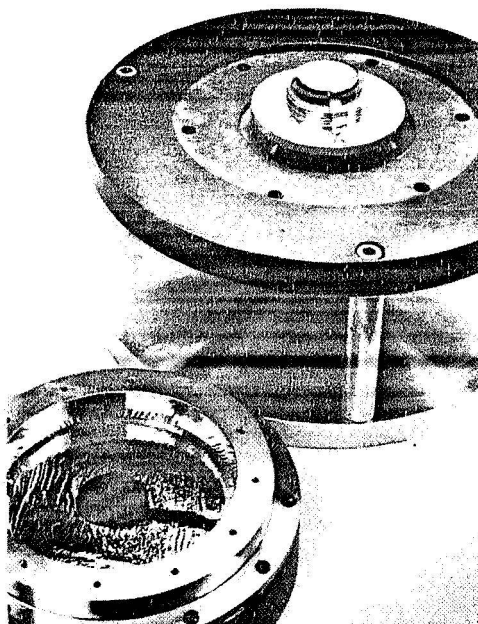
B. MIROS SUBASSEMBLY REMOVED FROM ASSEMBLY FIXTURE
